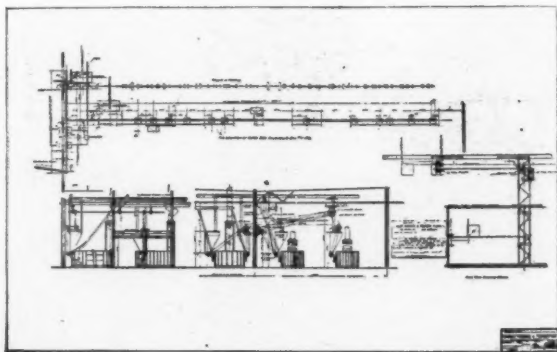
SHOWING ARRANGEMENT WHERE BELT-DRIVEN CONTROLLERS ARE USED INSTEAD OF MOTOR DRIVES.
